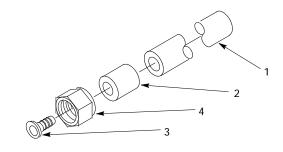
WATER BOOSTER TUBE ASSEMBLY
